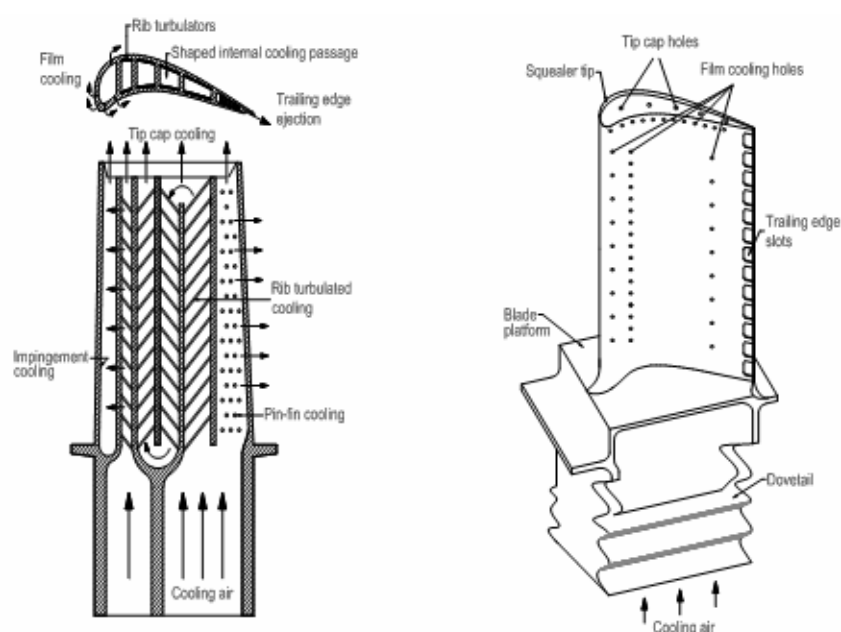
Schematic of the modern gas turbine with common cooling blade techniques.
